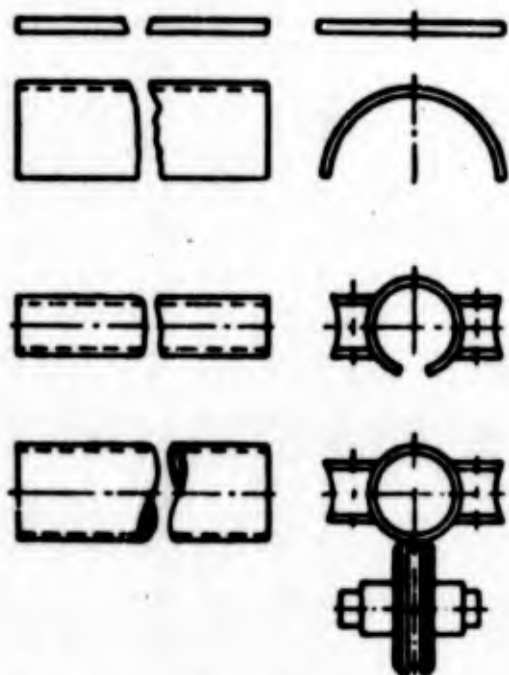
Diagram of roll-butt welding of tubular billets.
